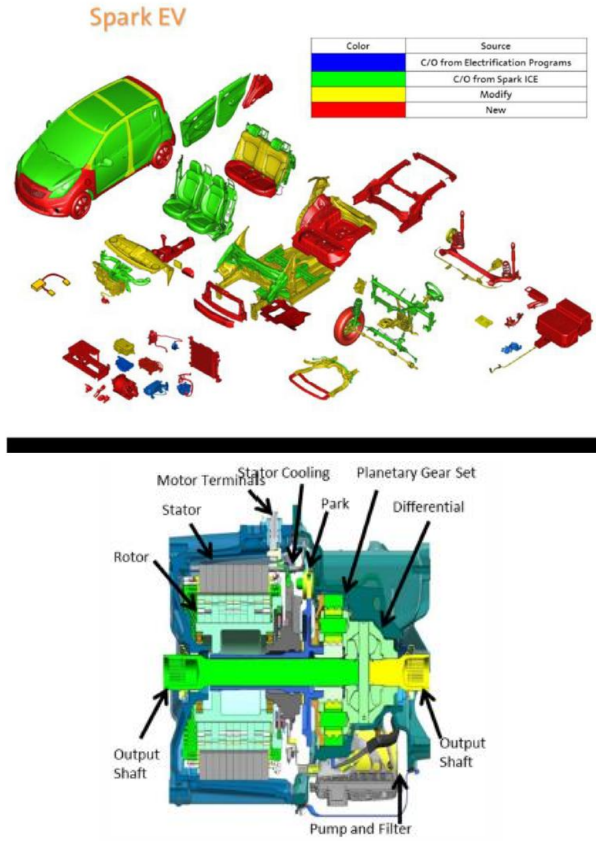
Chevy Spark EV full vehicle and motor and gearbox CAD drawings [10, 11]
